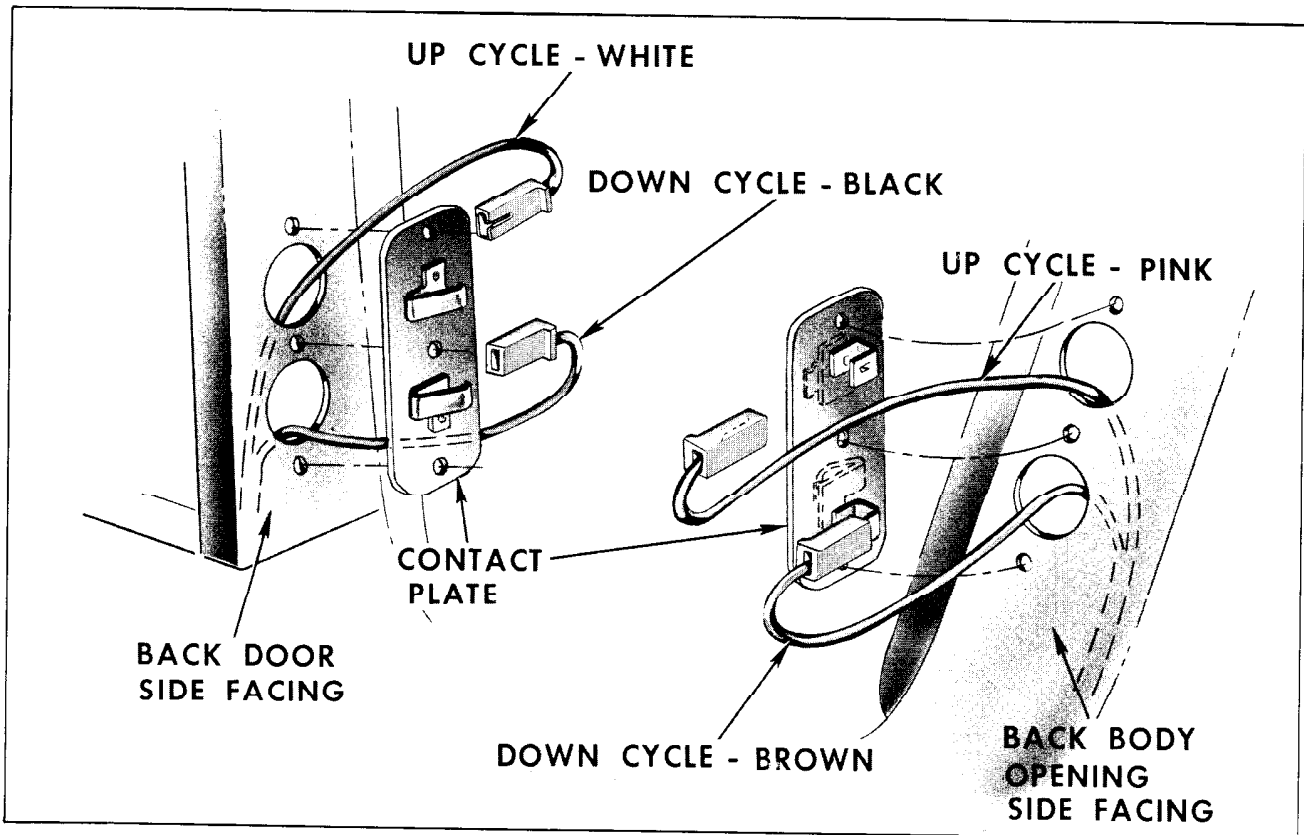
Wiring Installation - Back Door Dropping Window
